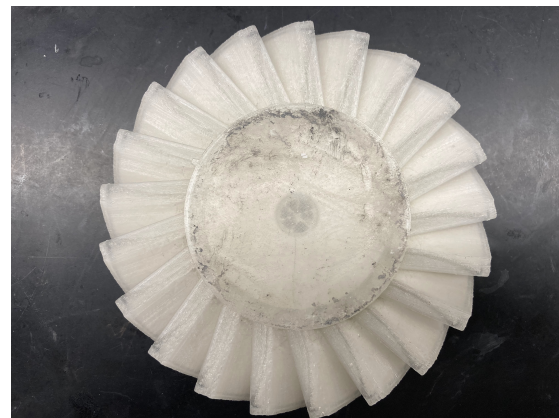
View of the turbine rotor after casting prior to the drying chamber
